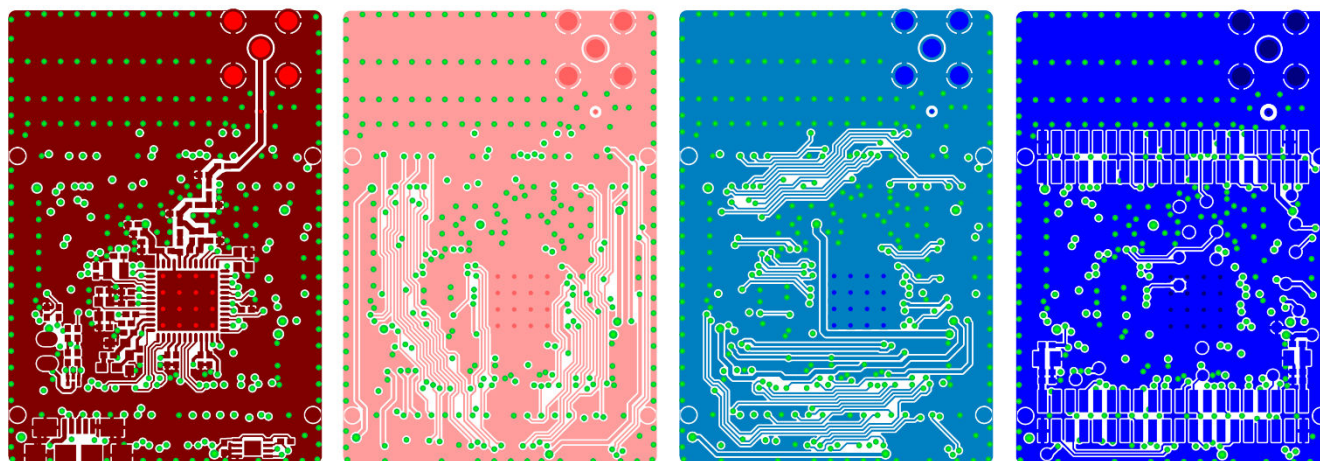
Layer Consistency on the Layout of BRD4502A Radio Board (Top, Inner 2, Inner 3, and Bottom, Respectively)
